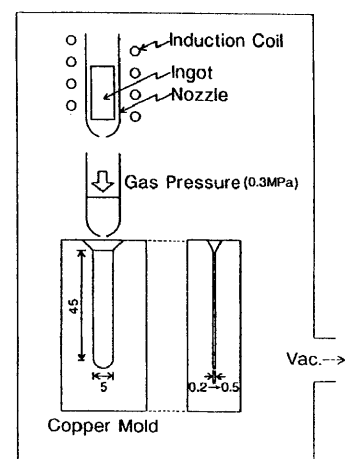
Schematic illustration showing the present metallic mold casting method.
